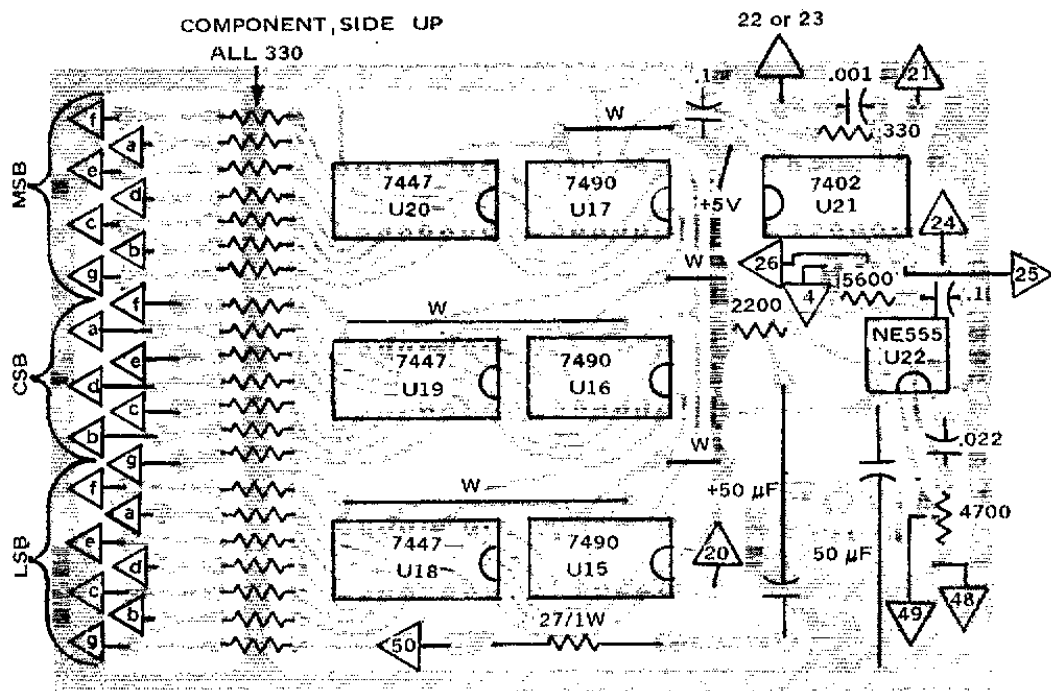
Etching pattern and component layout for driver board as seen from component side. W = wire jumpers. See Table I for wiring connections to other parts of the circuit.
